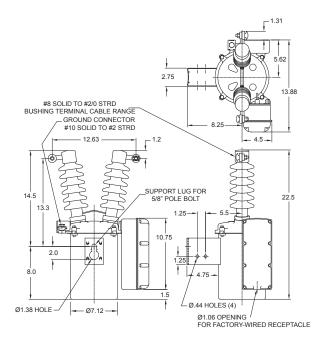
Outline dimensions of 125 kV BIL Type NR oil switch (22.0 kV Rating standard bushings and 15.0 kV Rating optional bushings).
